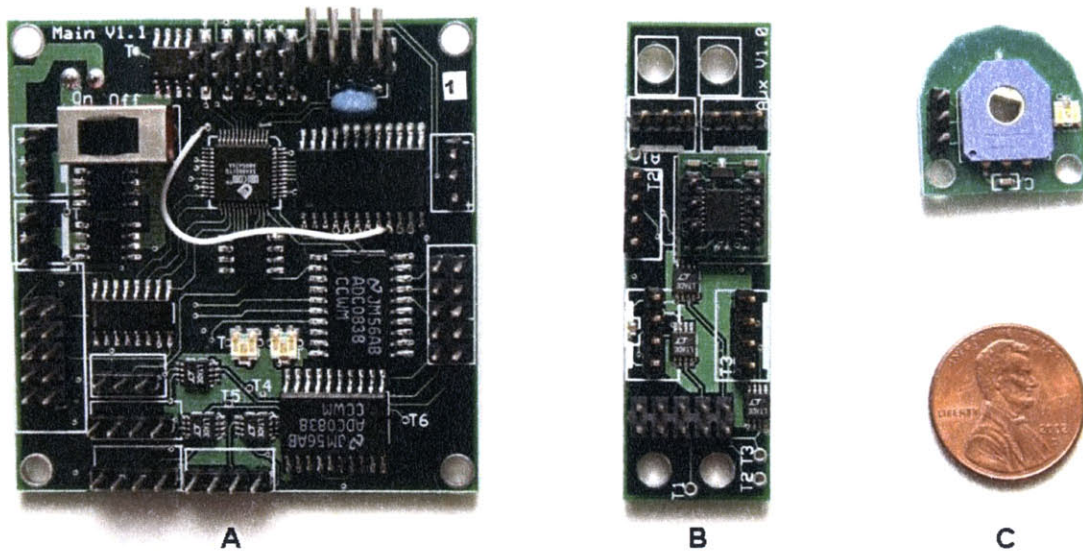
(A)The main PCB holds almost all the ICs. (B)This board lies in the horizontal plane and houses the compass. (C)This board mounts to the torque arm. The output shaft inserts into the potentiometer and actuates it.
